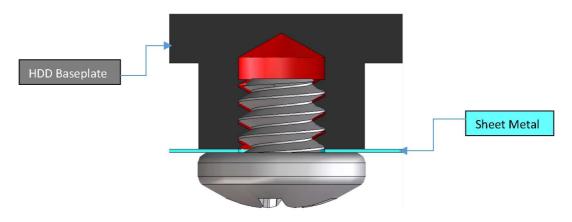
Bottom mount hole, 6-32UNC X 1/8" (3.8 threads engagement)
